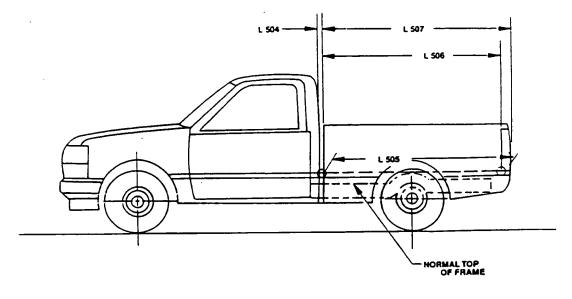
TRUCK CARGO SPACE DIMENSIONS, LENGTH
